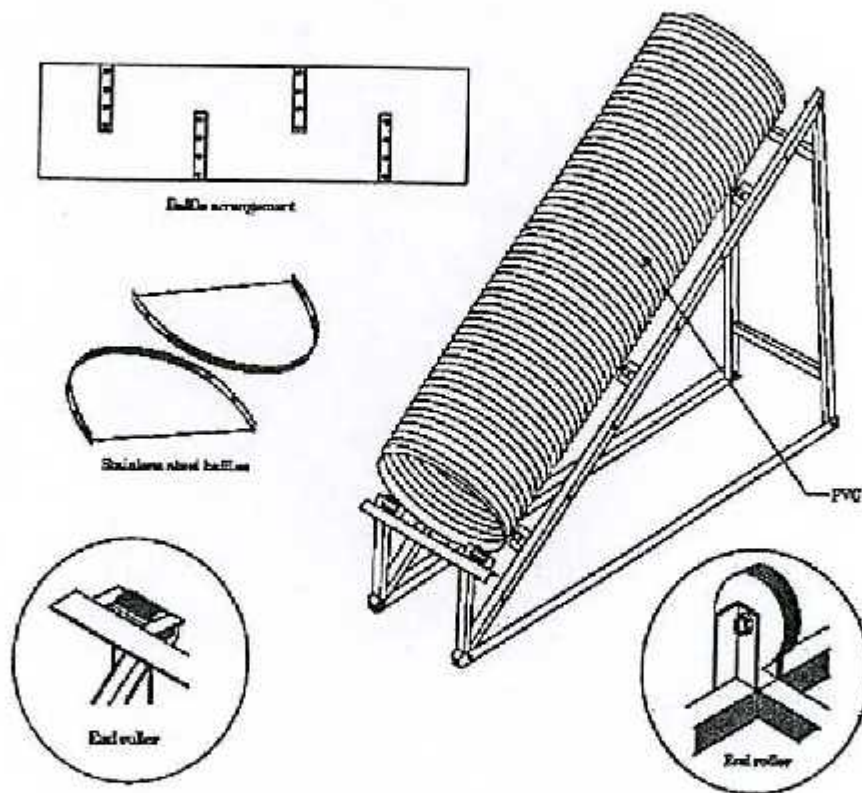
Rotating tube composting (National Engineering Handbook, Part 637 Environmental Engineering, Chapter 2, Composting, page 2-40)
